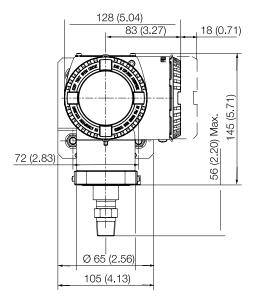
Dimensions - Barrel housing - 1/2 NPT female thread
